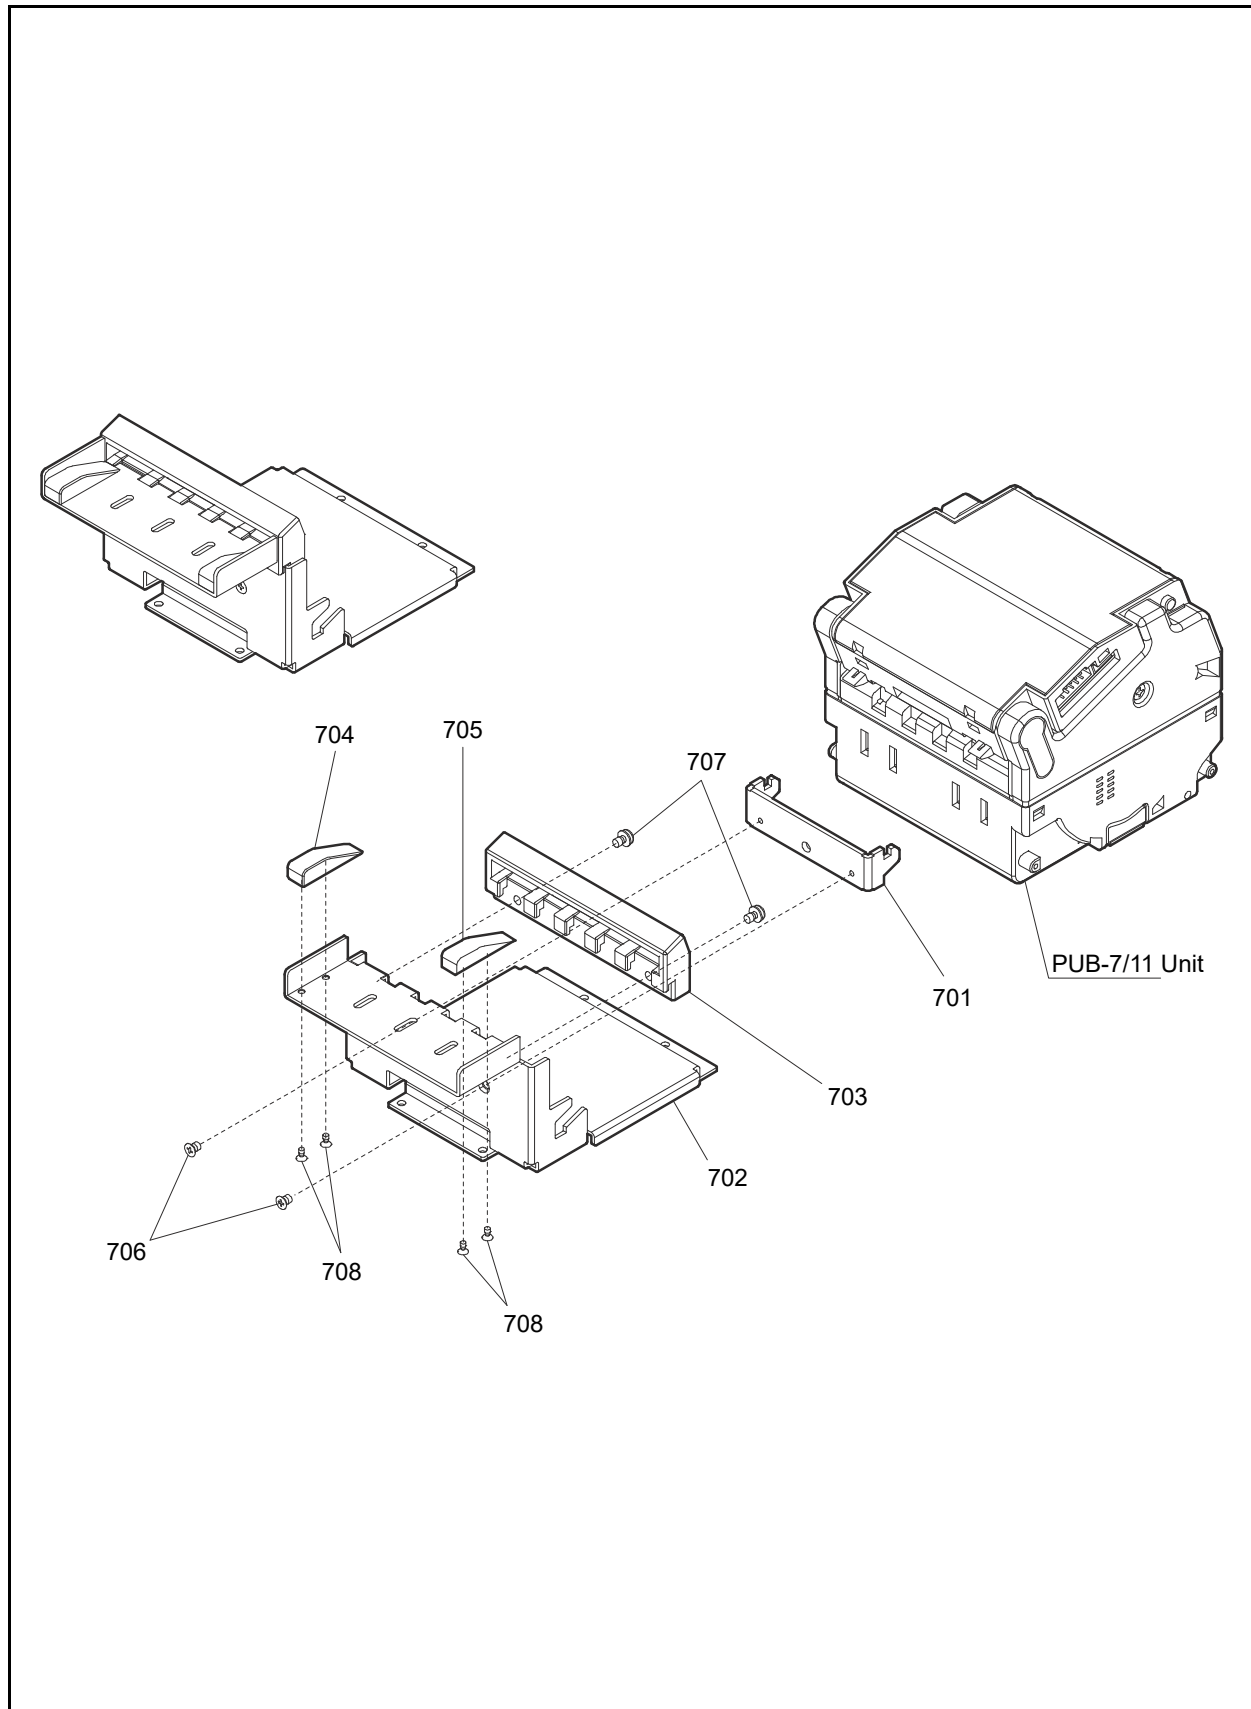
Taiko EBA Type Bezel Unit Exploded View
